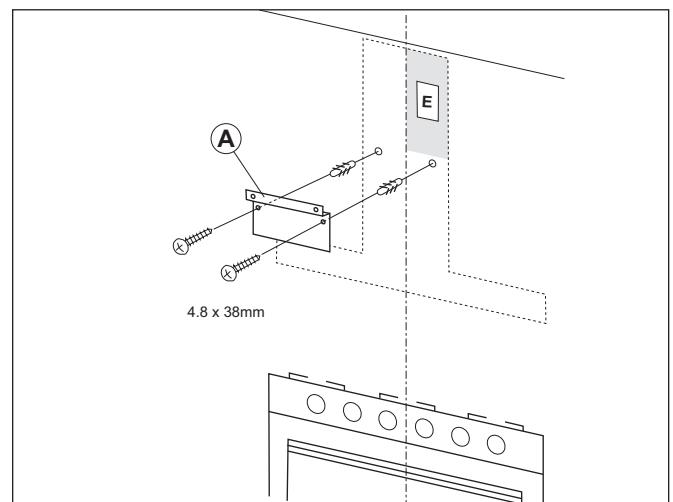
CTE Wall Hood Mounting Plate Mounting
